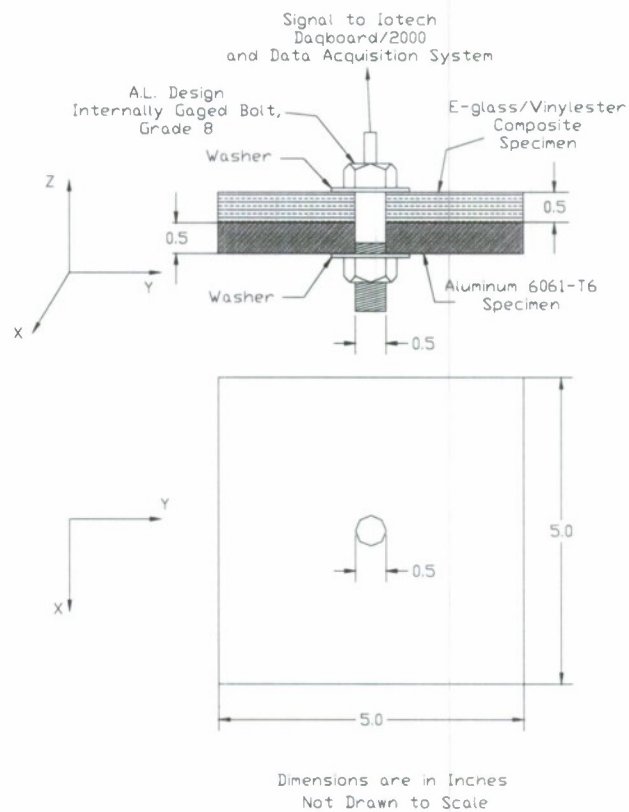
Single Bolt Hybrid Connection Test Specimen Schematic
